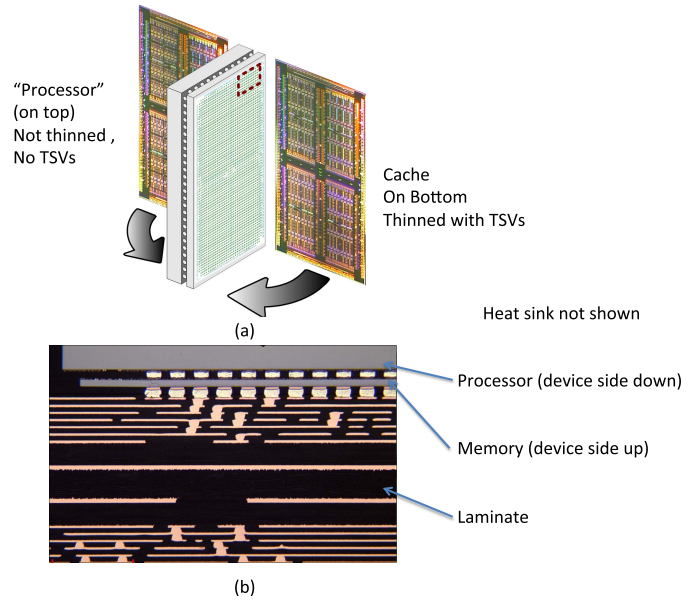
(a) Schematic of face-face Processor and cache assembly. (b) Optical cross-section of an assembled face to face 3-D stack.
